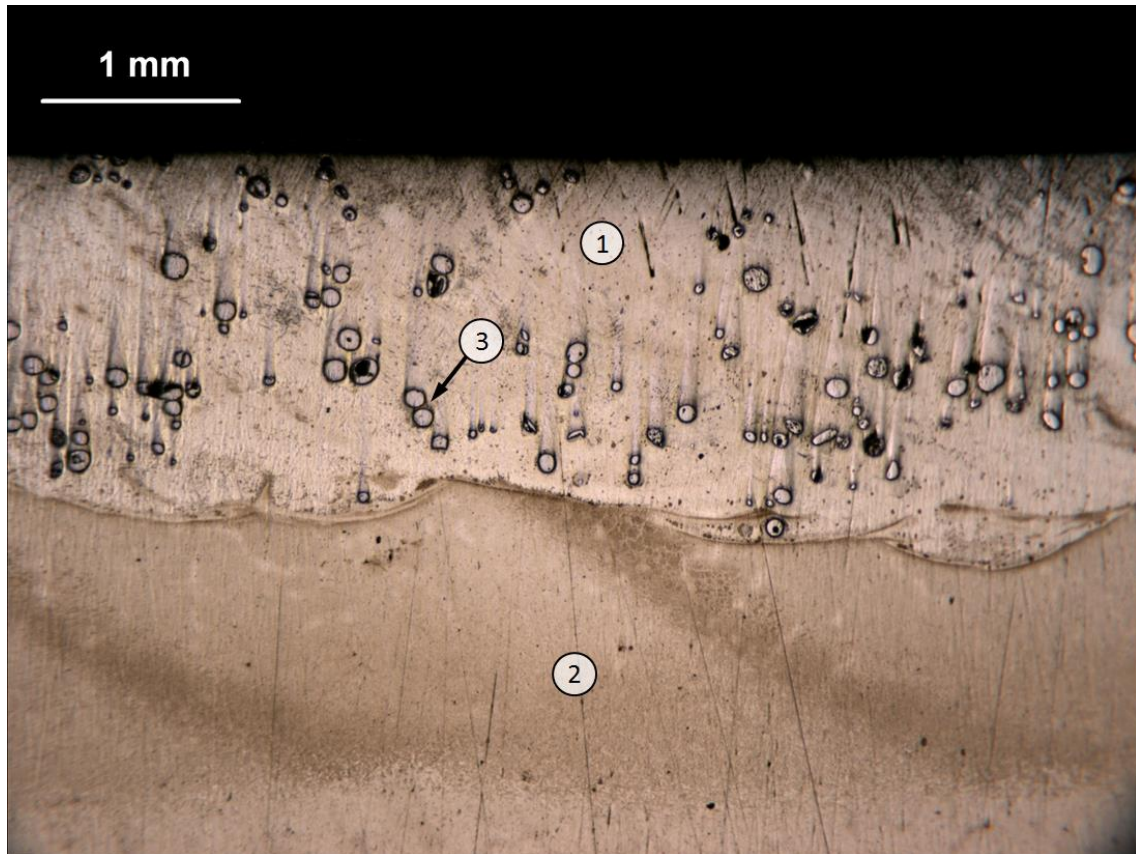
extract of figure 9-17, microsection of the 460 mm brake disc cladding layer, one welding trial; 1: functional graded layer; 2: HAZ; 3: WC particles
